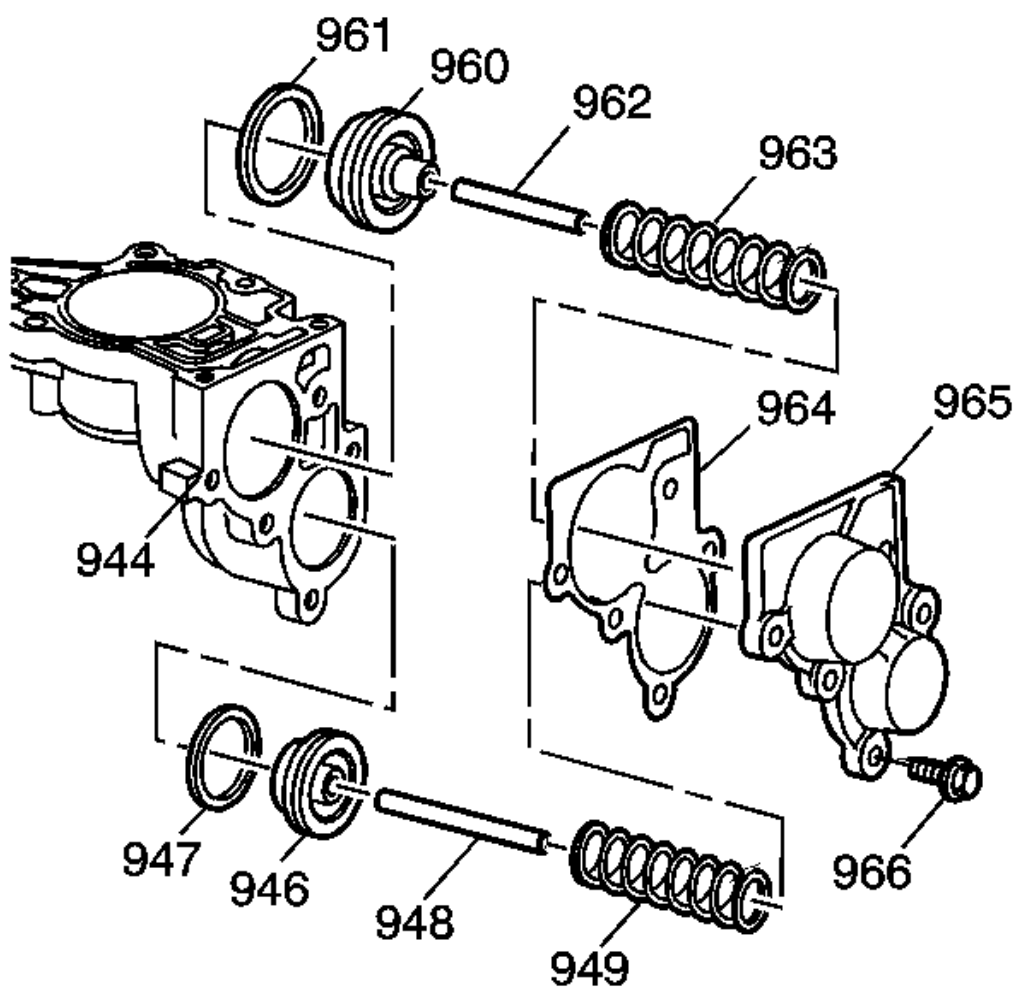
View Of Forward Accumulator Assembly & Reverse Accumulator Assembly
